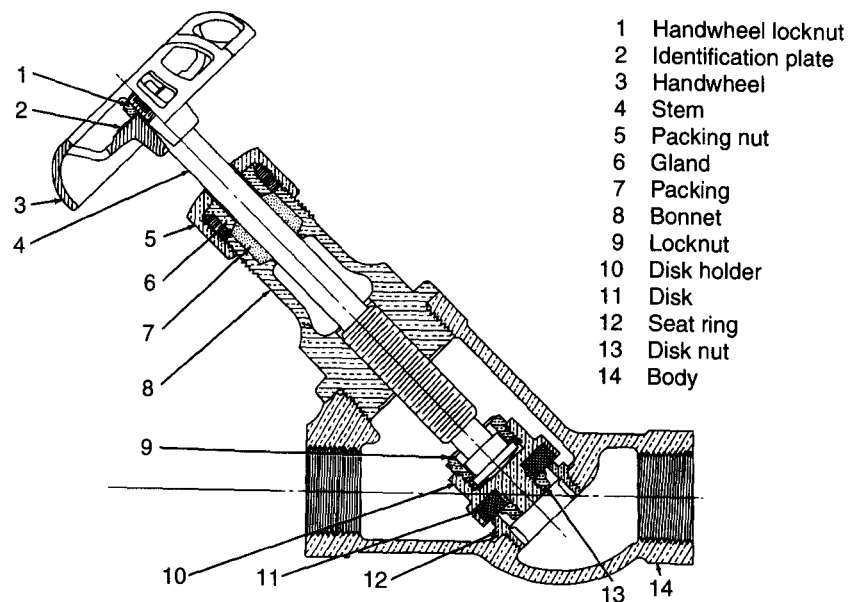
Y-pattern globe valve. Courtesy Crane Company.
